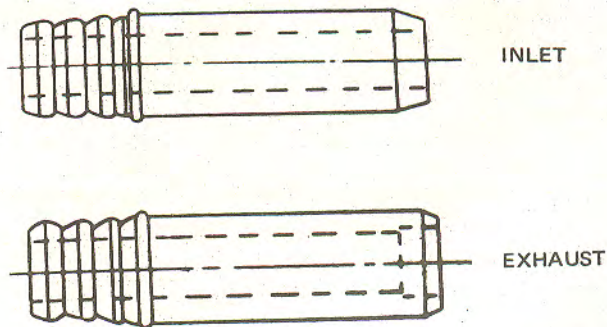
The drawing shows the difference between the valve guides for the inlet and exhaust valves.
